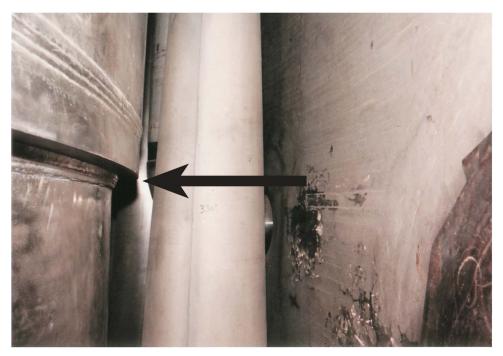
Illustration of the Overhanging Configuration of Weld H6b
